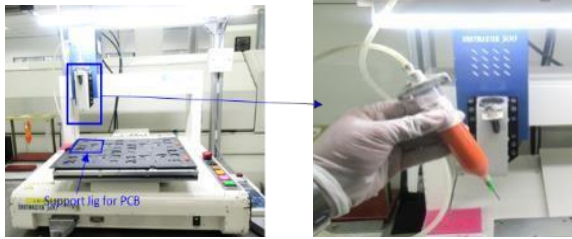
Bonding machine for epoxy application and setup epoxy to the machine
